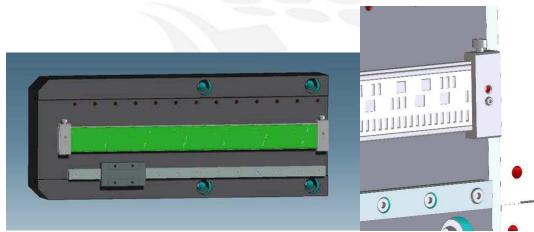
Scale on encoder mount plate (left), clamping screw over solid portion of scale (right).
